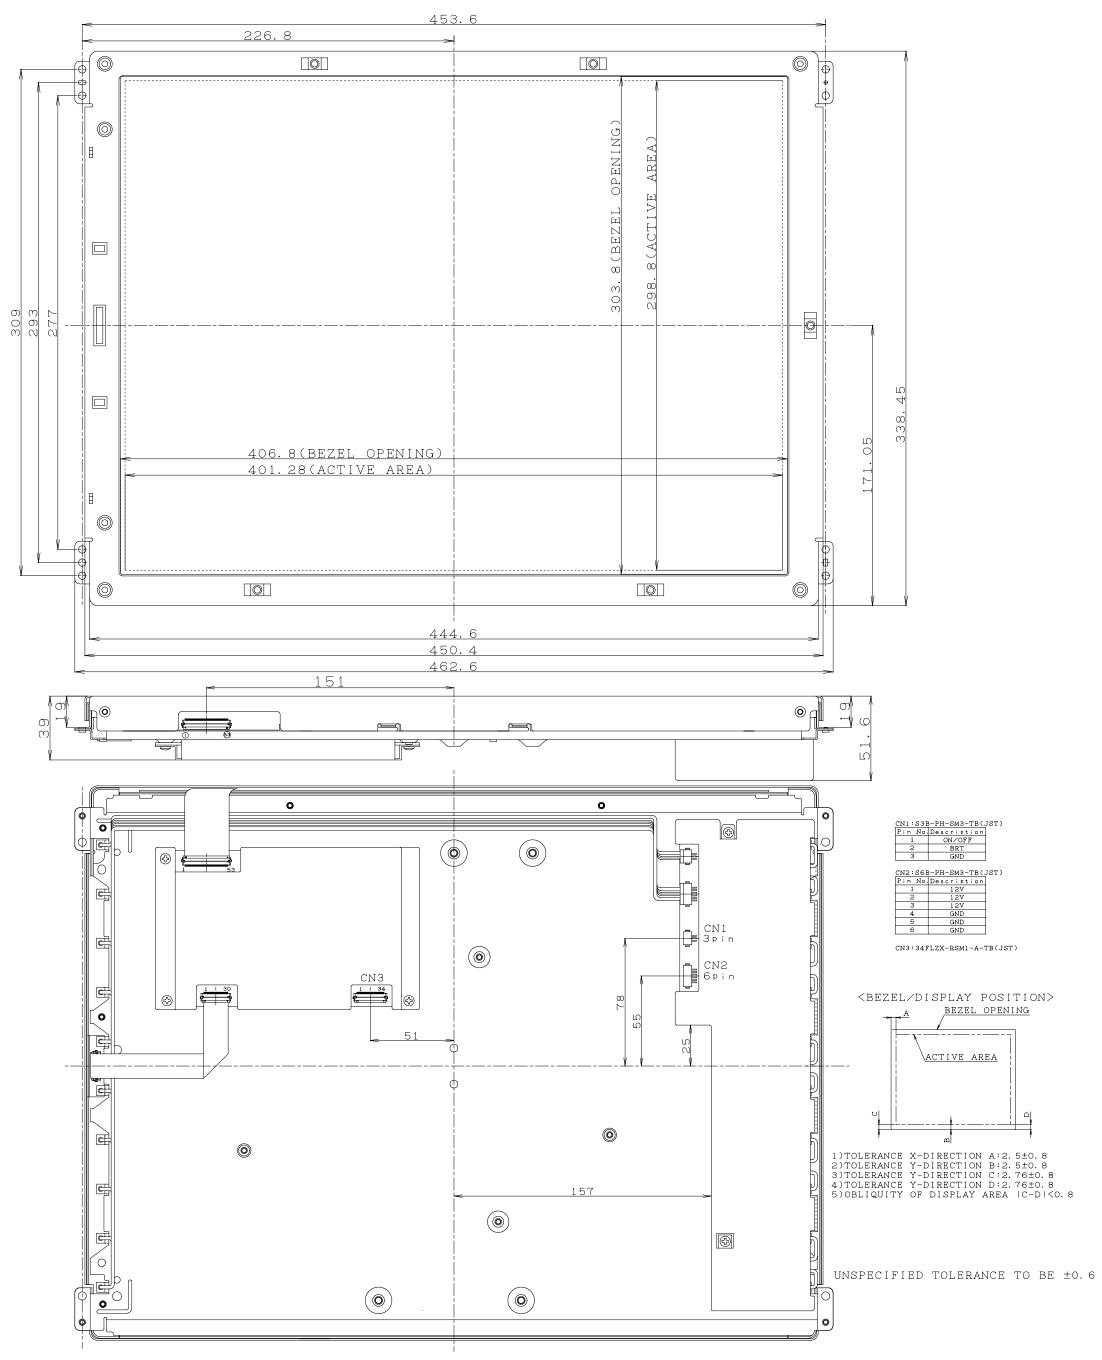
OUTLINE DIMENSIONS (LQ197V3DZ31)
